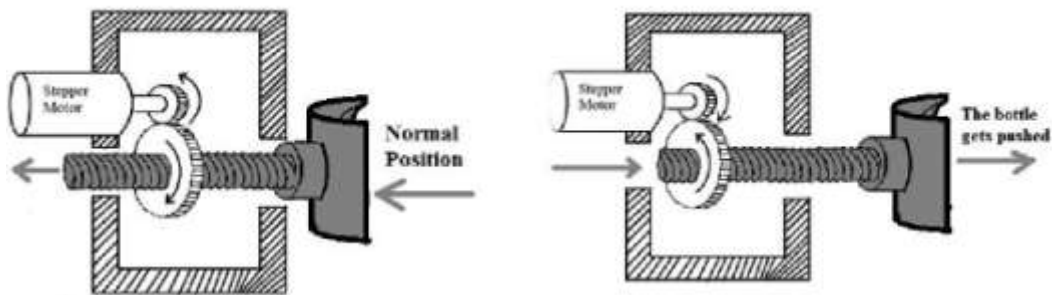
At normal position (When bottle has passed) Fig.3b Bottle is Pushed (When Bottle Fails check)
